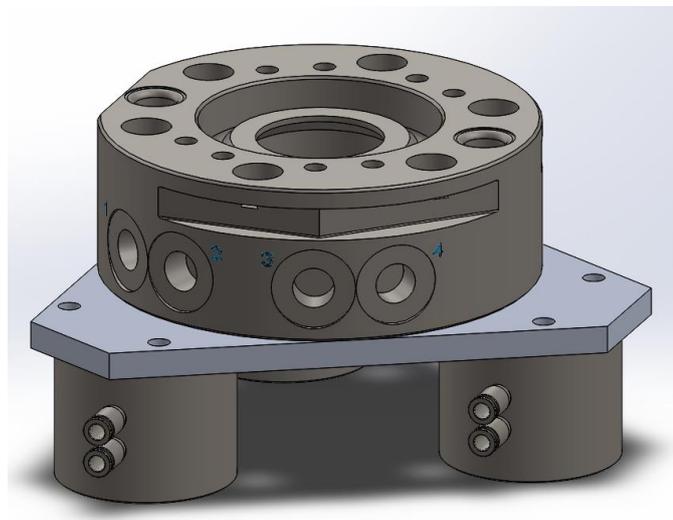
CAD-model of magnetic gripper, the width of the gripper is 190 mm and height is 70 mm.
